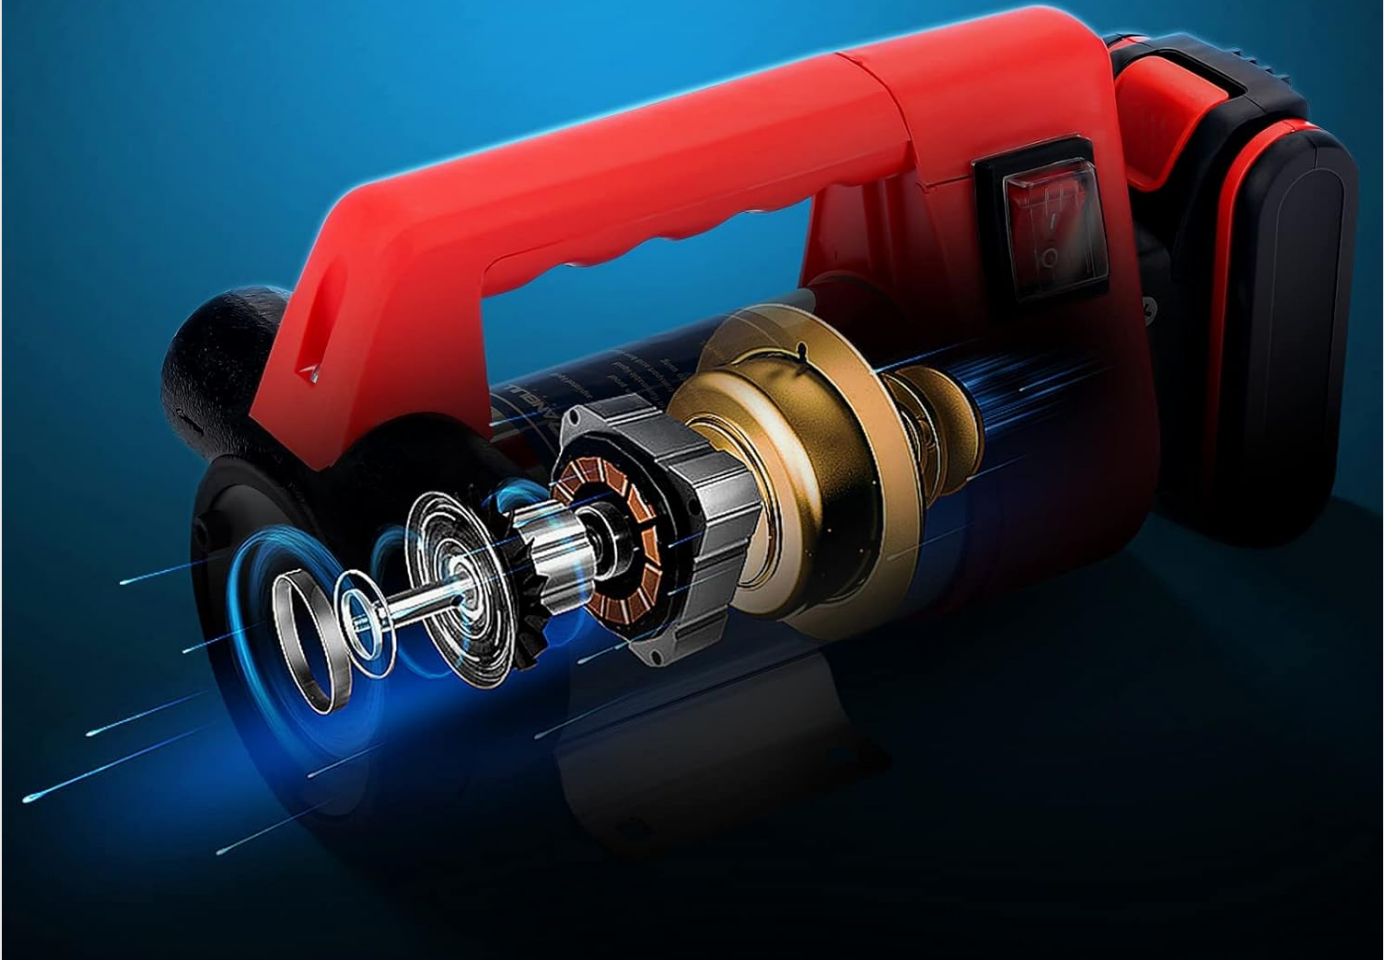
Main unit of the ANBULL Cordless Fuel Transfer Pump. The pump features a red handle and a silver cylindrical body, with a black battery pack attached.
